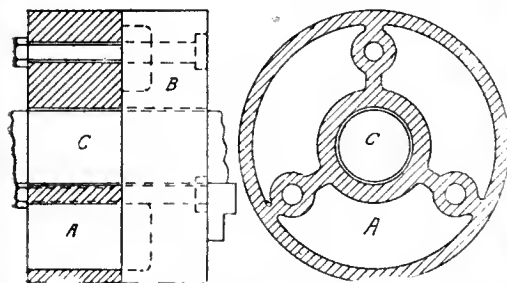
CHUCK EXTENSION PIECE FOR INSIDE BORE MACHINING.
